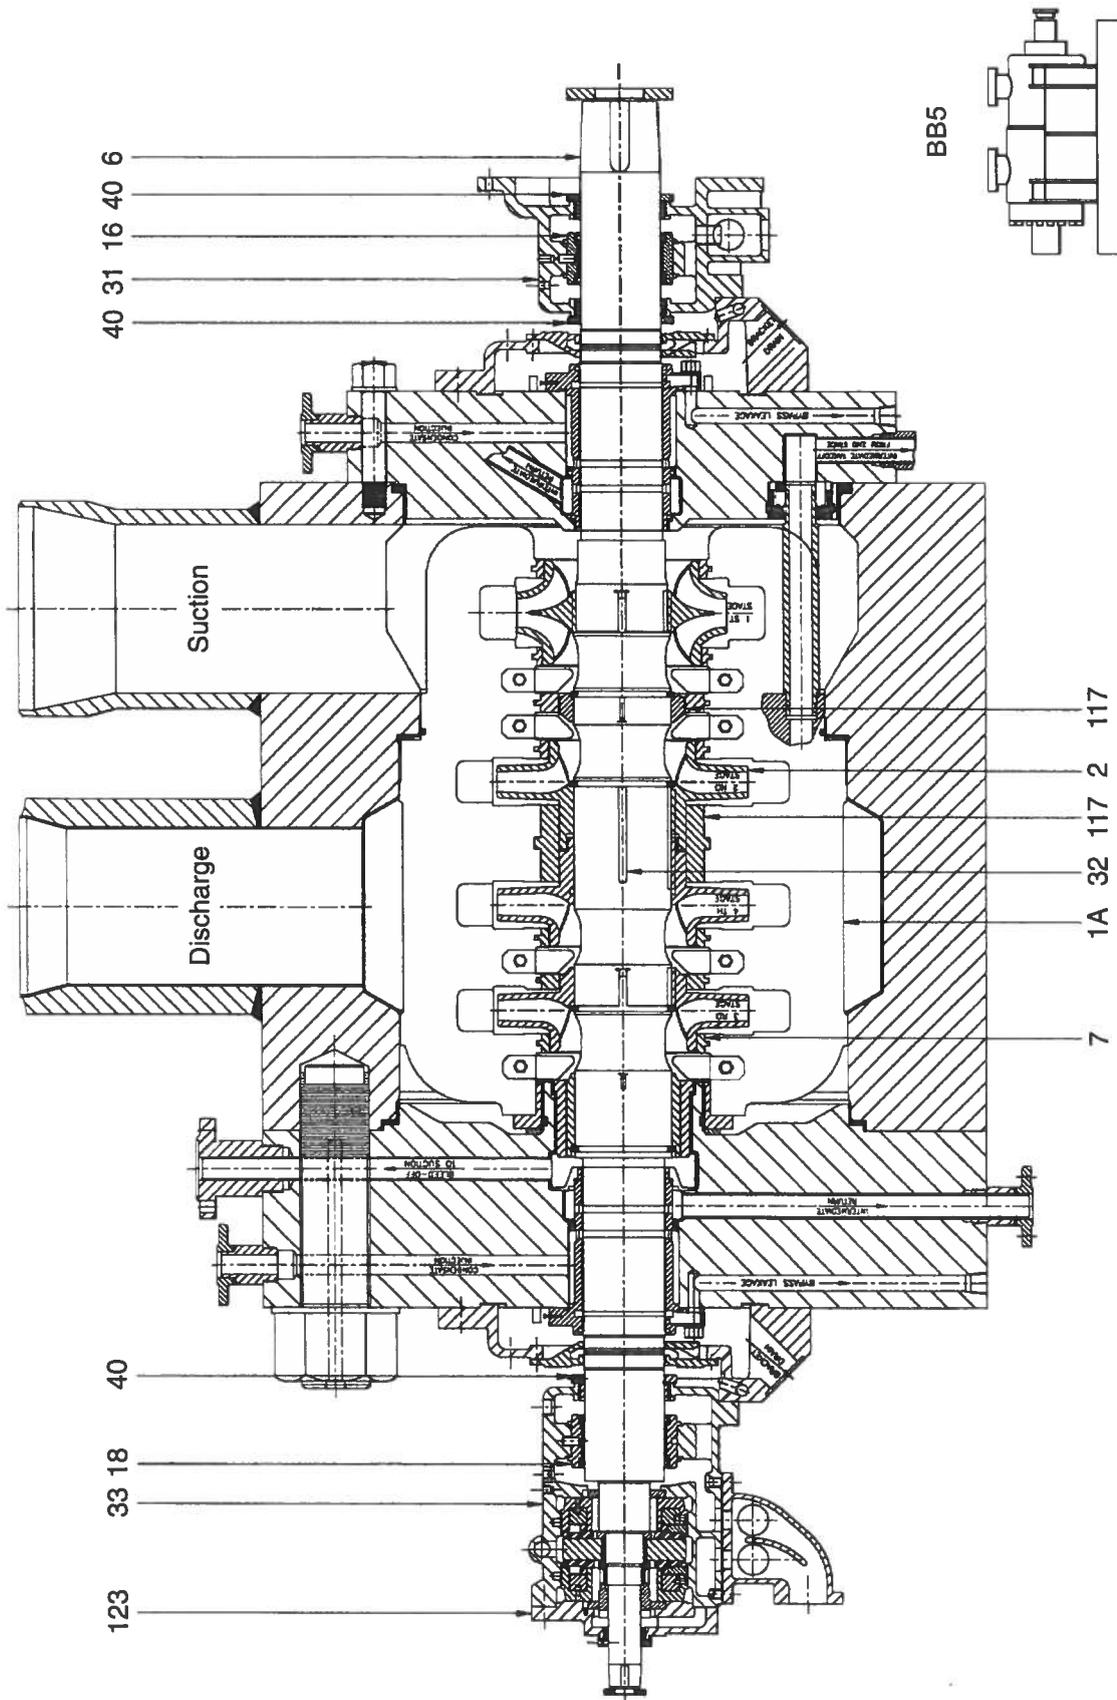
Impeller between bearings – flexibly coupled – multistage – radial split-double casing
